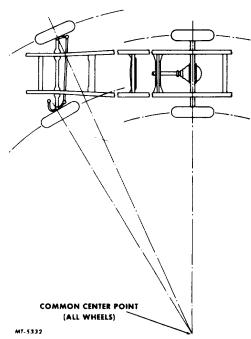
Inner Wheel Turns in a Smaller Circle Than Outside Wheel
